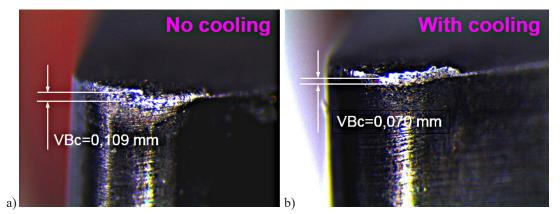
Comparison of the wear images of the cutting tool corner, a) wear achieved in the absence of cutting tool cooling; b) processing with cutting tool cooling
